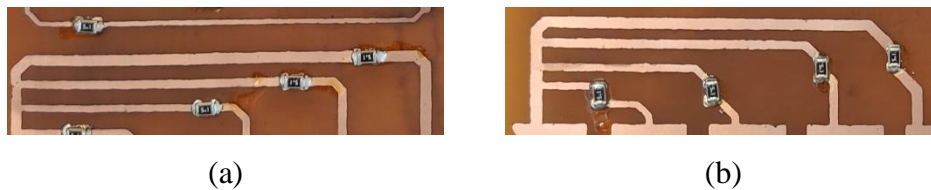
SMD resistances mounted on the PCB, (a) parallel to tracks, (b) perpendicular to tracks
